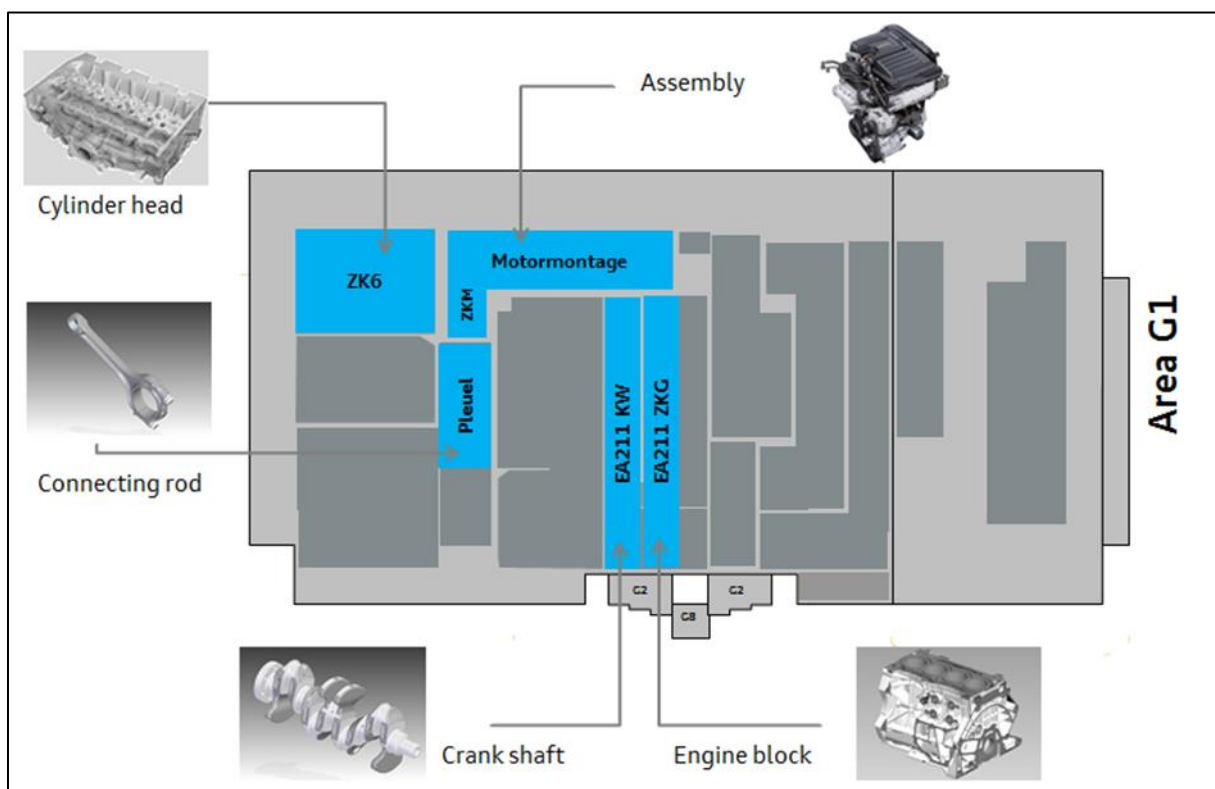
Layout of the construction and assembly line EA211 R4 Otto (adapted from: Czingráber, 2015, p. 14)
